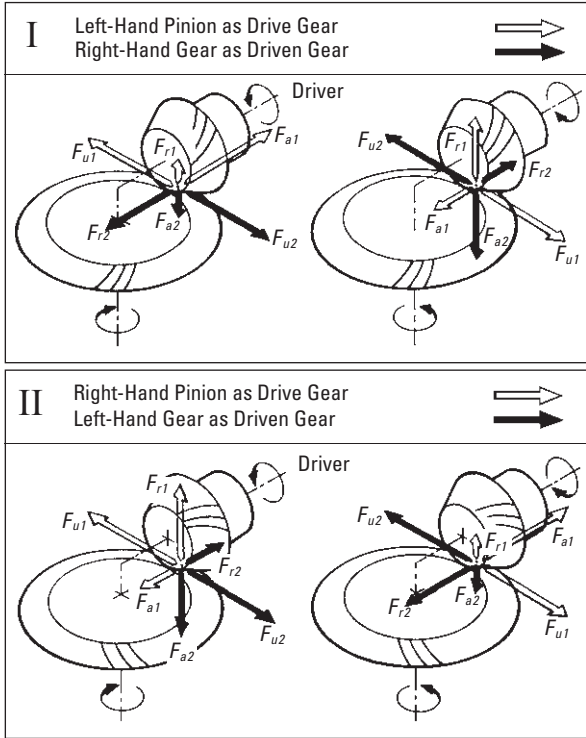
The Direction of Forces Carried by Spiral Bevel Gears (2)
